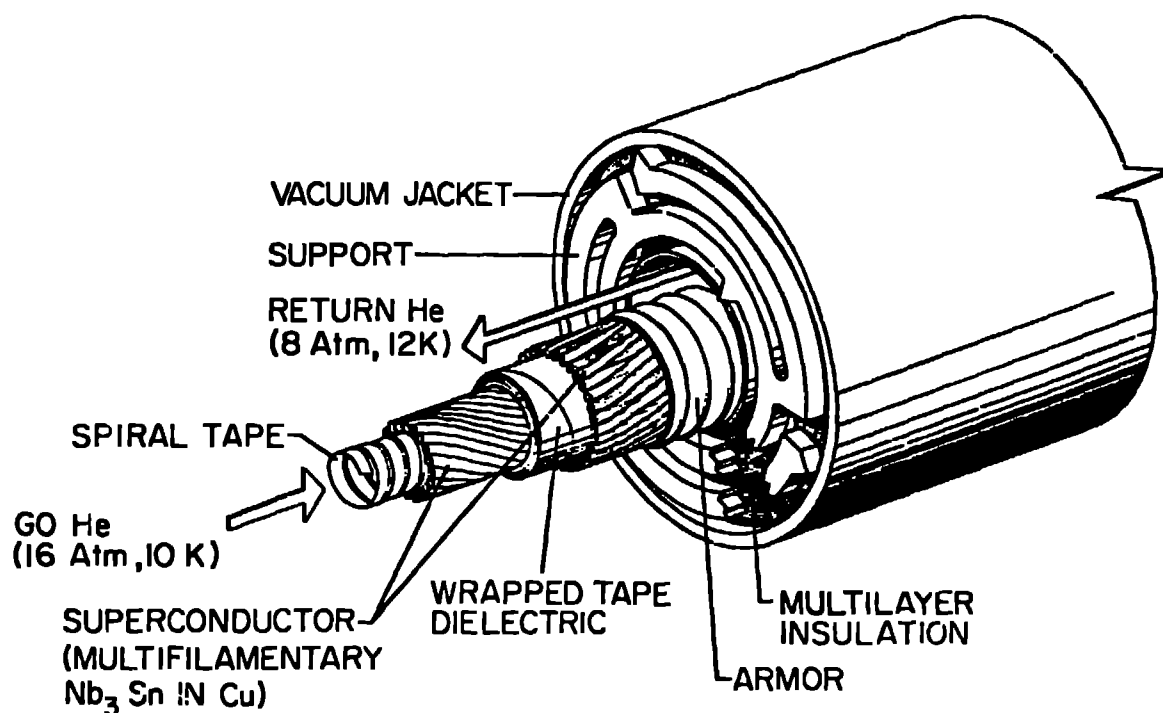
Cutaway drawing of LASL dc SPTL cable design. For operation at 100 kV and 50 kA (5,000 MW), outside diameter of enclosure would be approximately 290 mm.
